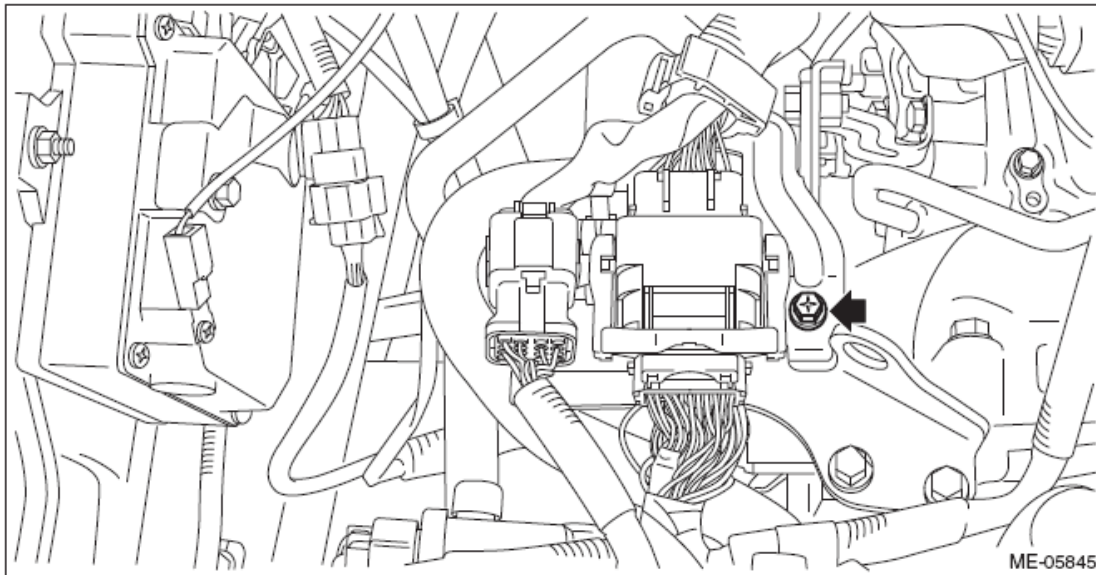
Locating Bulkhead Harness Connector Bracket Bolt
